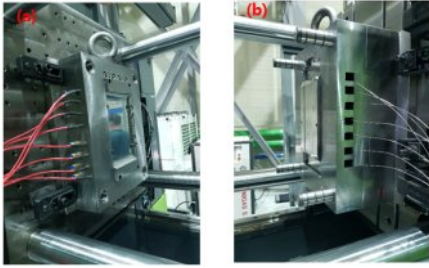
Photograph of (a) stationary mold and (b) movable mold
